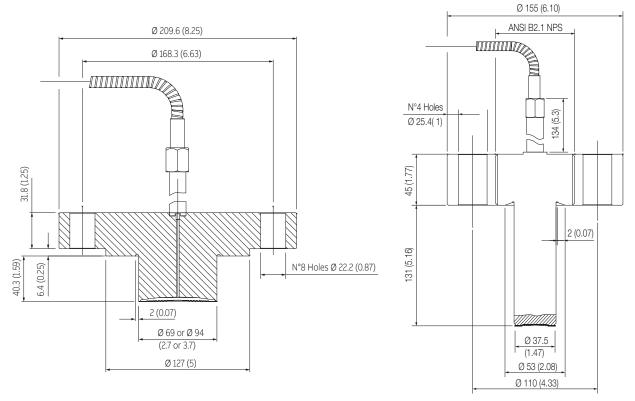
S26PN Model 2 1/2 in.urea service seal Flange ASME 600, 3 in.
